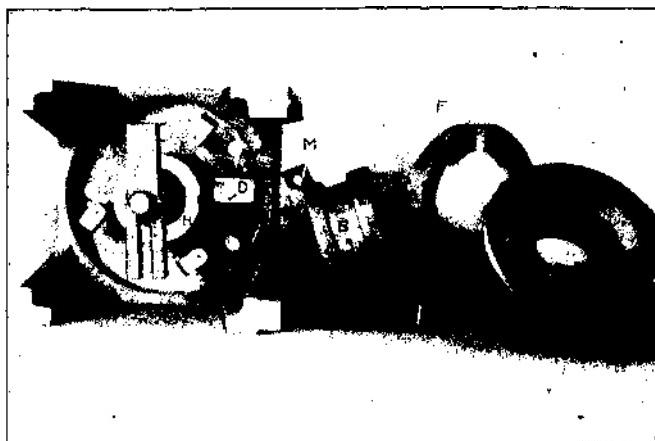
Drill Jig for Parts of Friction Clutches shown at the Right
